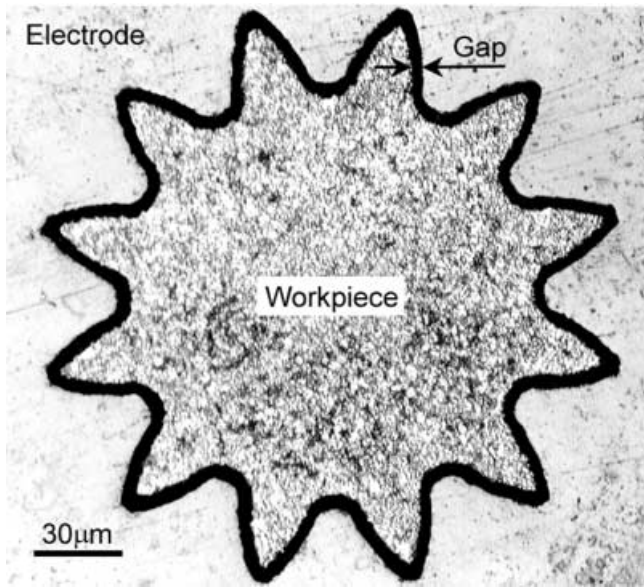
Gap between electrode and EDMed workpiece (two superimposed photographs of electrode and workpiece with the same magnification)
